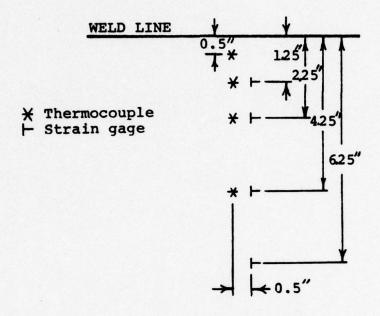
Thermocouple and Strain Gage Location on HY-130 Specimen I and 1020 Steel
